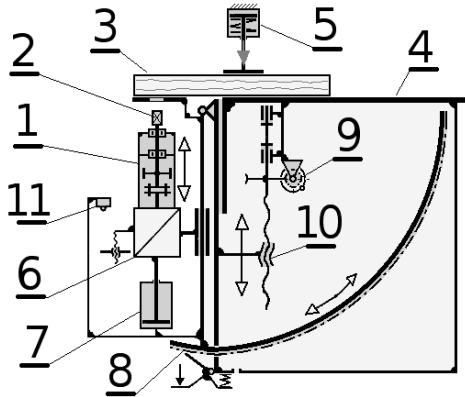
Scheme of the multi-spindle drilling machine DCWGW 19; 1 – working unit, 2 – drill bit, 3 – working element, 4 – working table, 5 – air cylinders, 6 – electrical motor, 7 – working unit feed air cylinder, 8 – latch mechanism, 9 – snail gear box, 10 – screw mechanism, 11 – end switch
